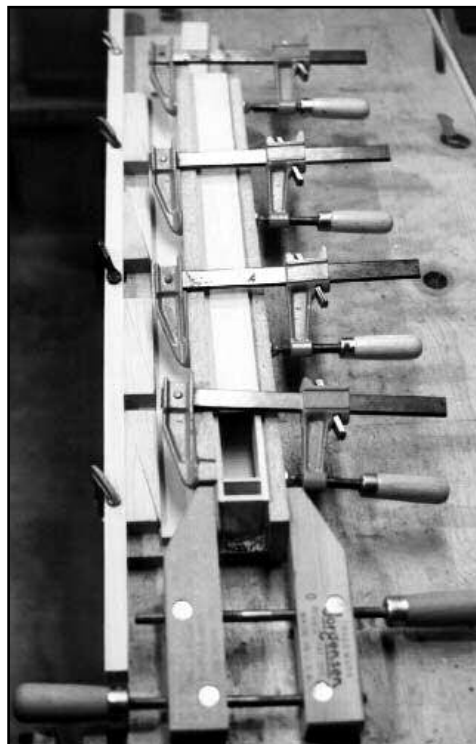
A jig made to hold the clamps squarely against a glued pipe.
